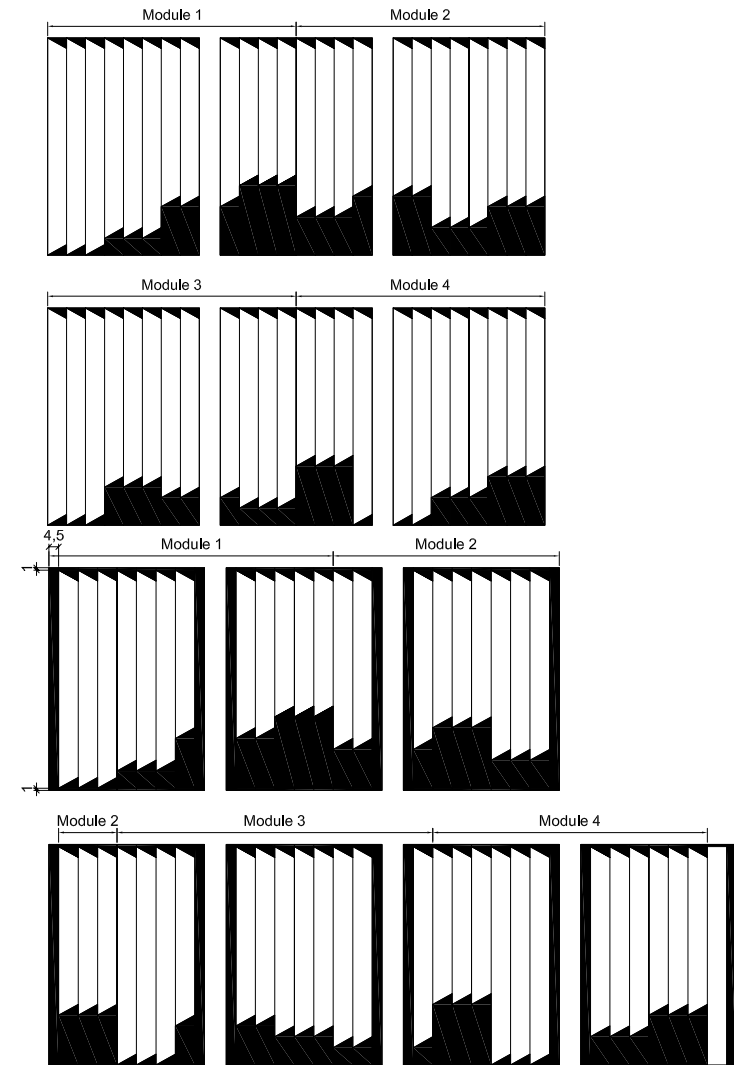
Material wasted cutting with the paper cutting machine (top) versus the laser cutter (bottom).
